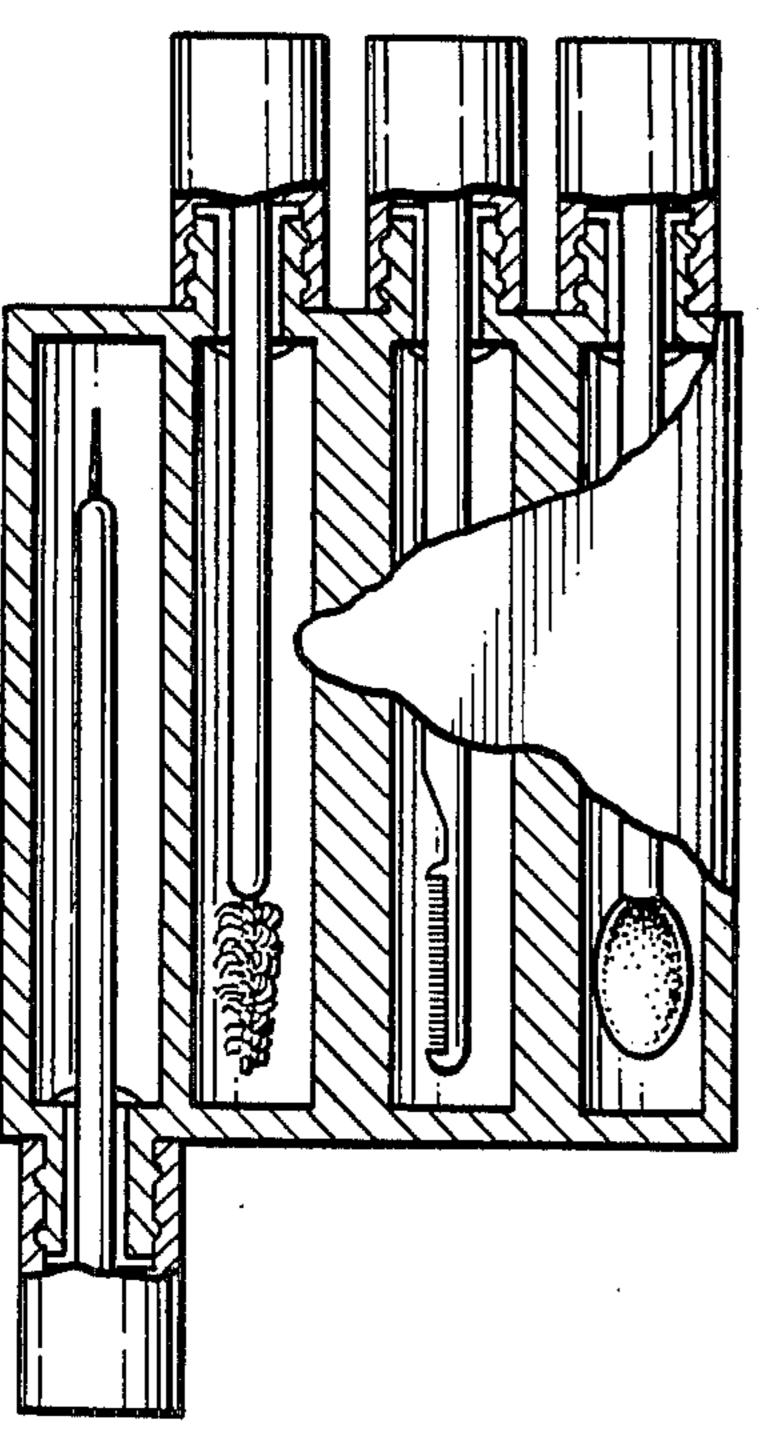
is a side elevational view with partial cross-section showing a ninth embodiment of our new design;
